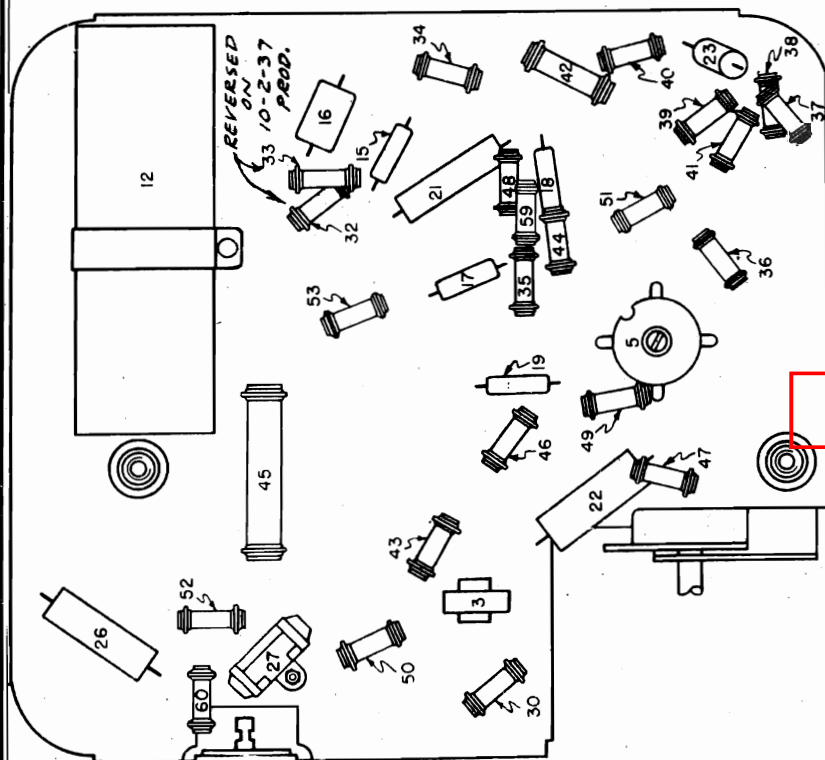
PARTS LAYOUT-BOTTOM VIEW
